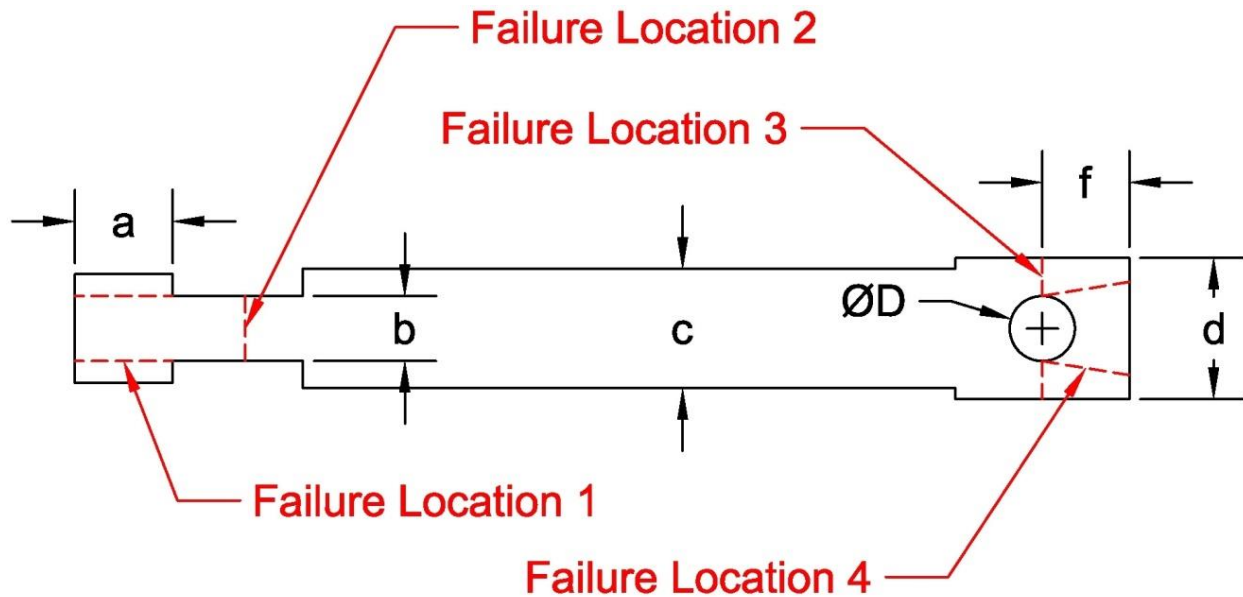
Dimensions and Failure Locations for Bolted Tabbed Bracket Design
